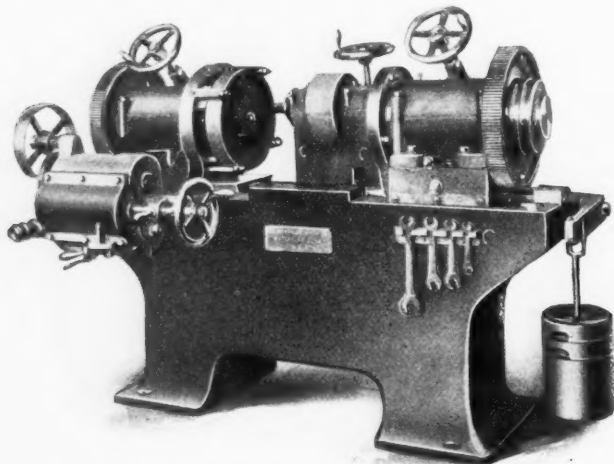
The Manville Machine for cutting Plate and Face Cams.
